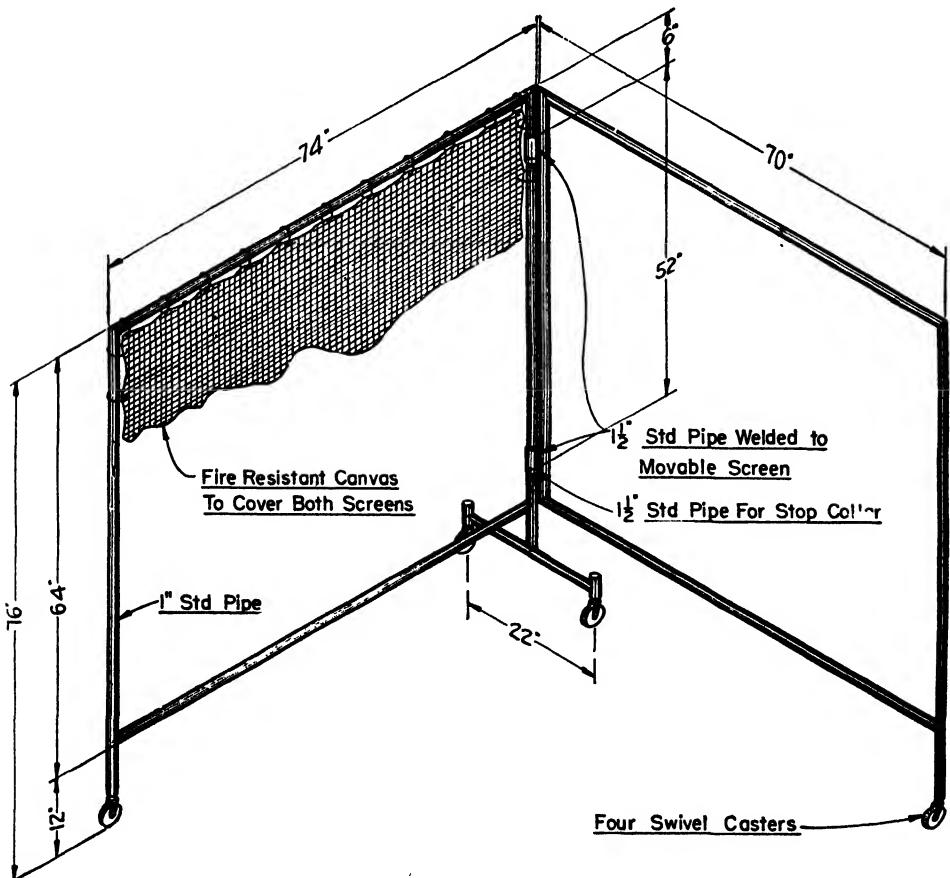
Plan for a portable welding screen. (James F. Lincoln Arc Welding Foundation)
